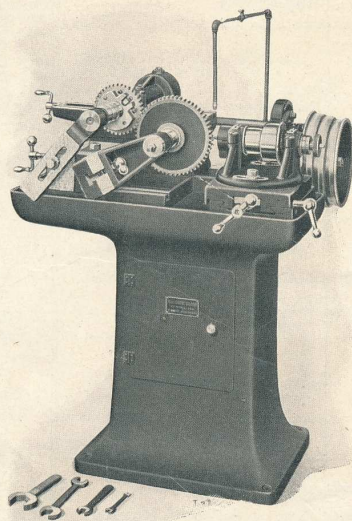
"ROCHESTER" GEAR TOOTH ROUNDING MACHINE
